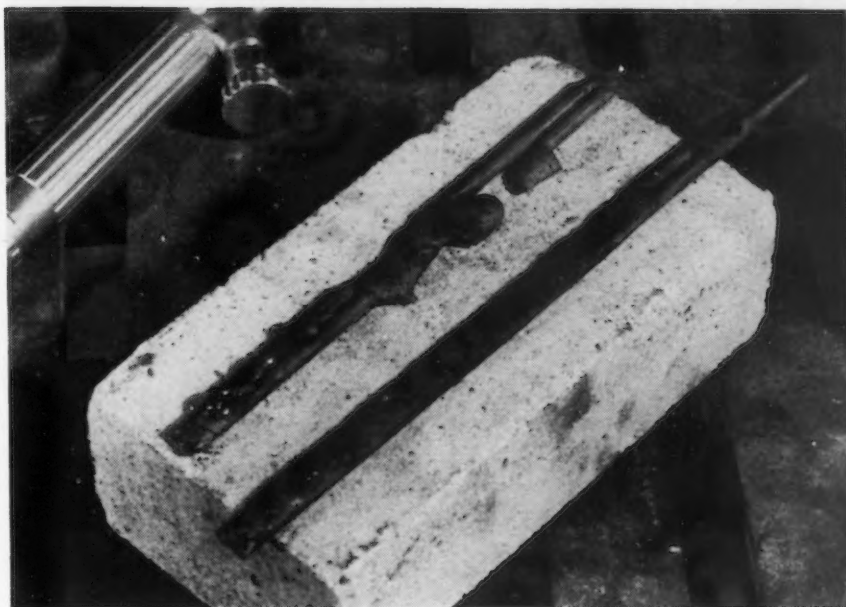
Good and bad fusion welds. The base metal in the weld at the left was not hot enough for the first few inches; then it was heated too much and melted through.
